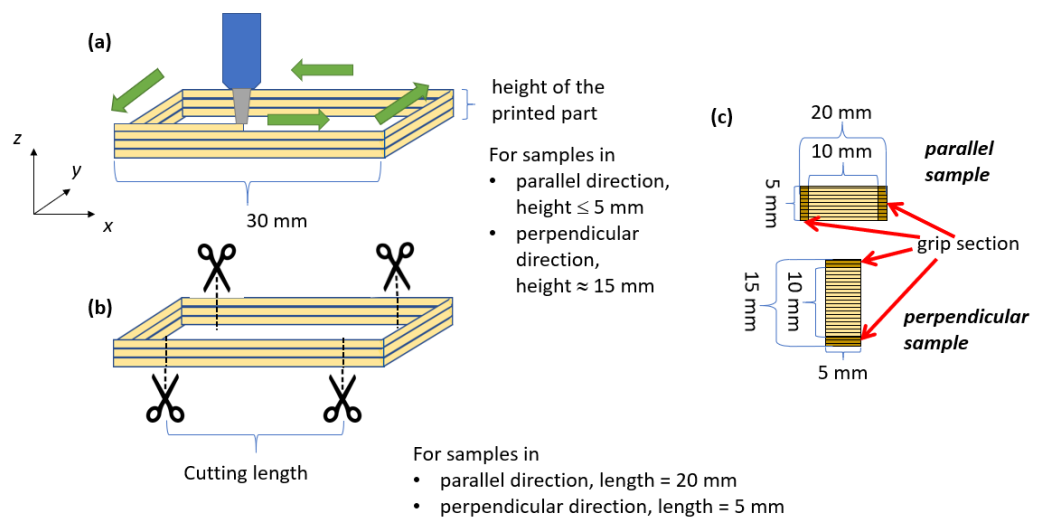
Fabrication of DMA test samples from a printed box with walls that are a single filament thick, with (a) the printing direction, (b) cutting lines, and (c) final sample dimensions.
